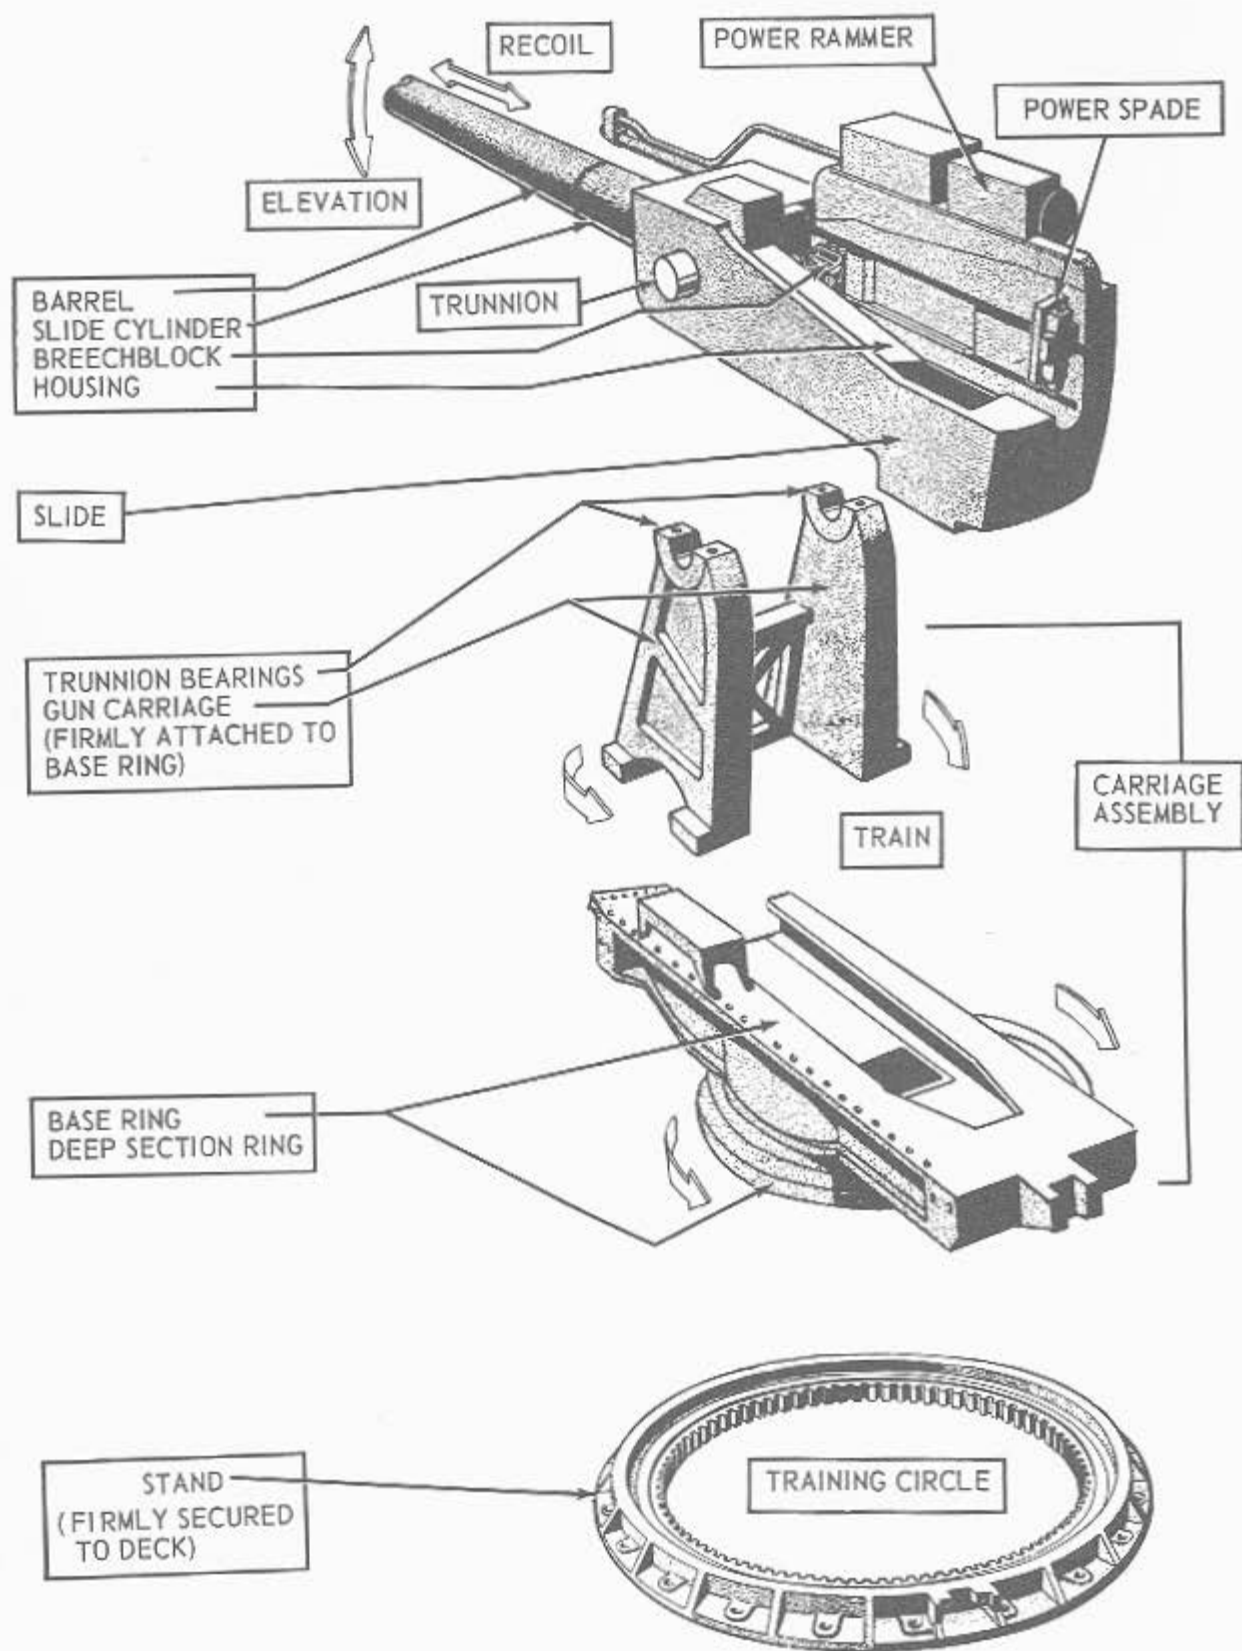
B2.—Main assemblies of a 5-inch mount. (Exploded view.)
